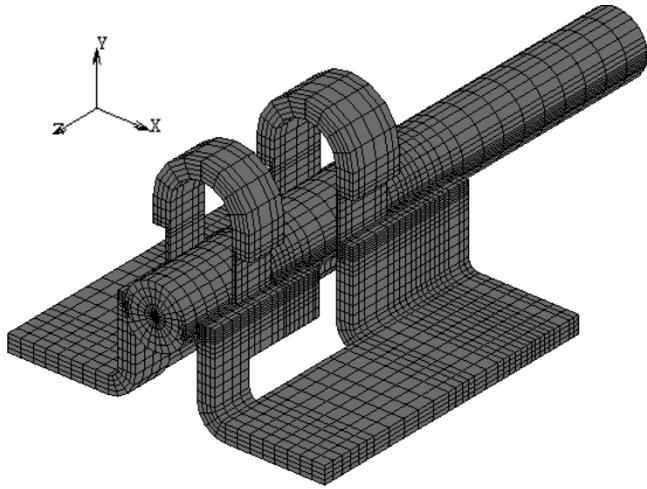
FE discretization of the fiber ferrule-to-dual saddle shaped weld clip welding structure.
